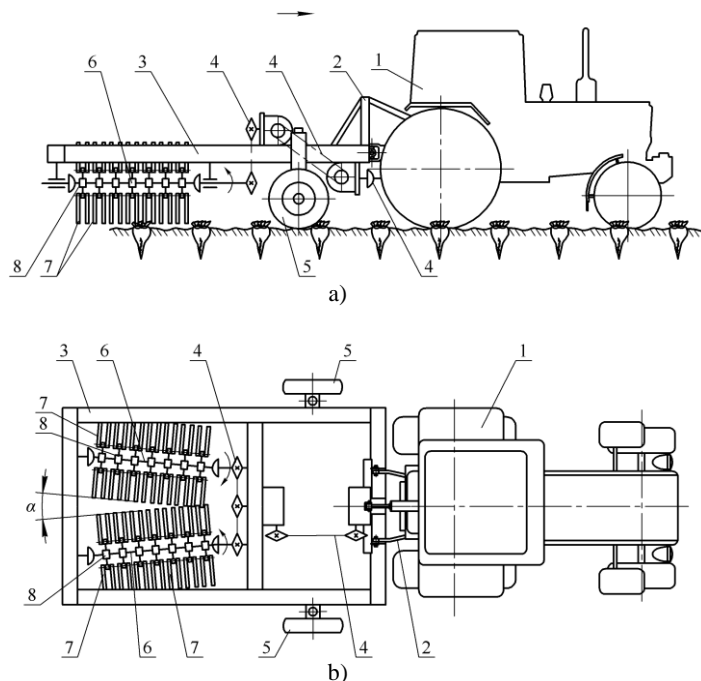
Structural scheme of the experimental setup: a) side view; b) top view: 1 – tractor; 2 – hitch; 3 – main frame; 4 – drive elements; 5 – sensing wheels; 6 – drive shafts; 7 – working bodies; 8 – spokes
